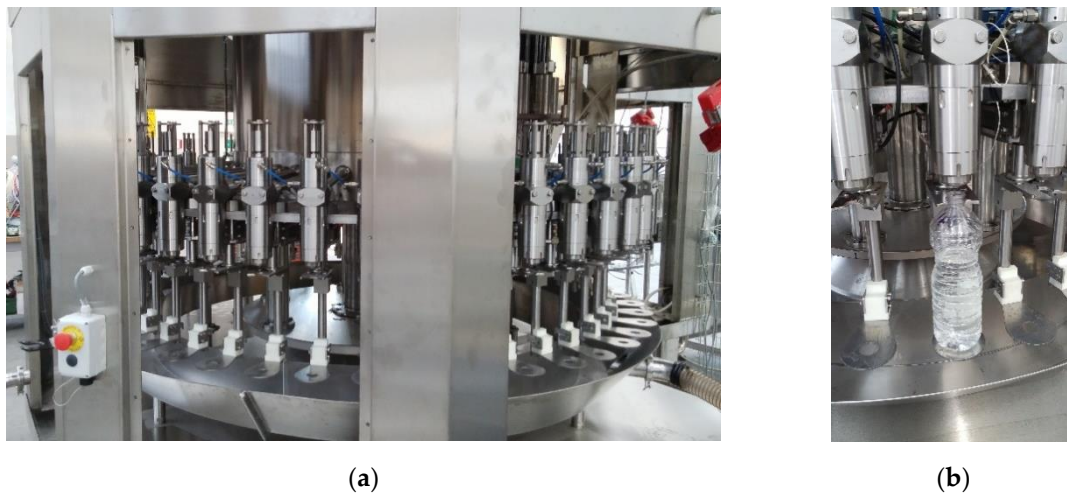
(a) Detail of the main carousel of a weight filler. (b) Details of a station: fluid dispenser and bottle holder plate.
